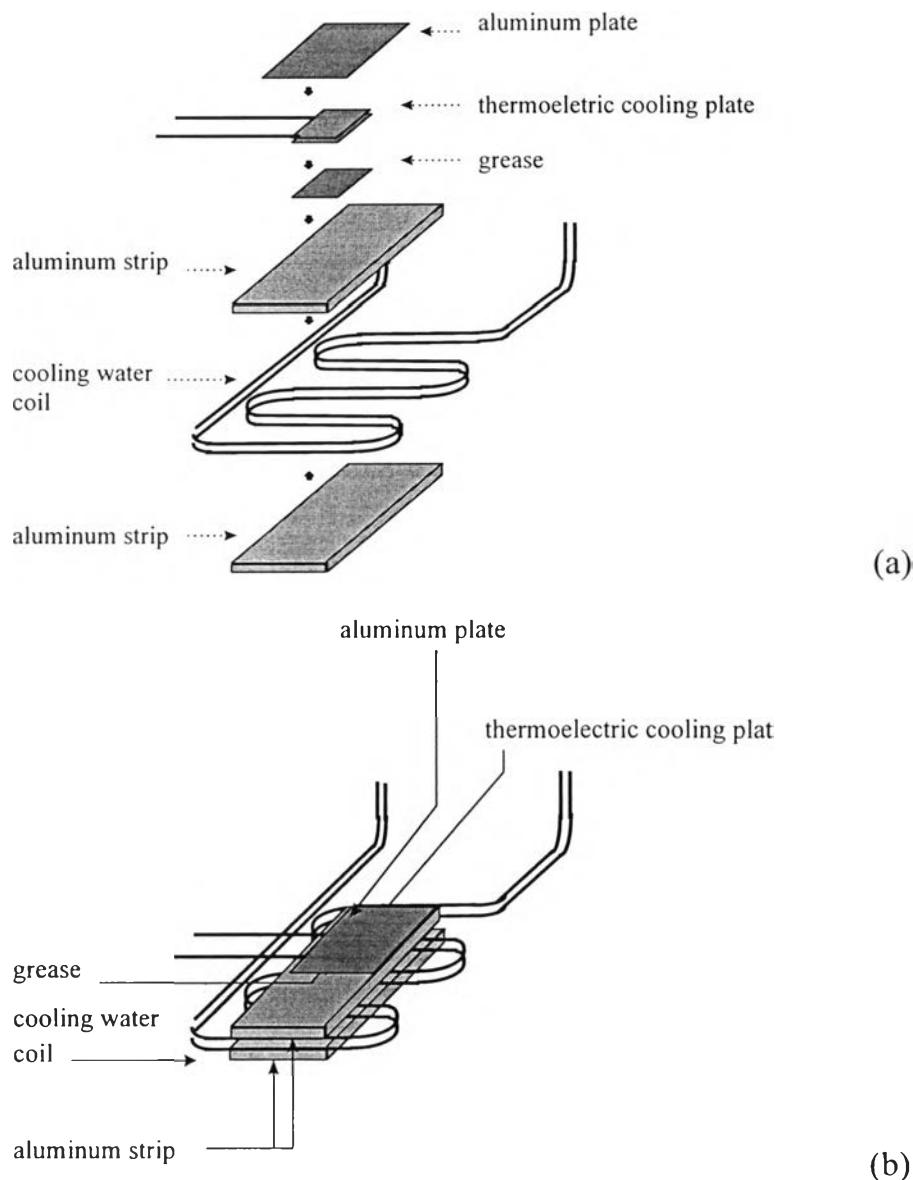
The set up of water cooling coil for thermoelectric cooling plate device (a) the layer-by-layer assembling; (b) the final assembly.
